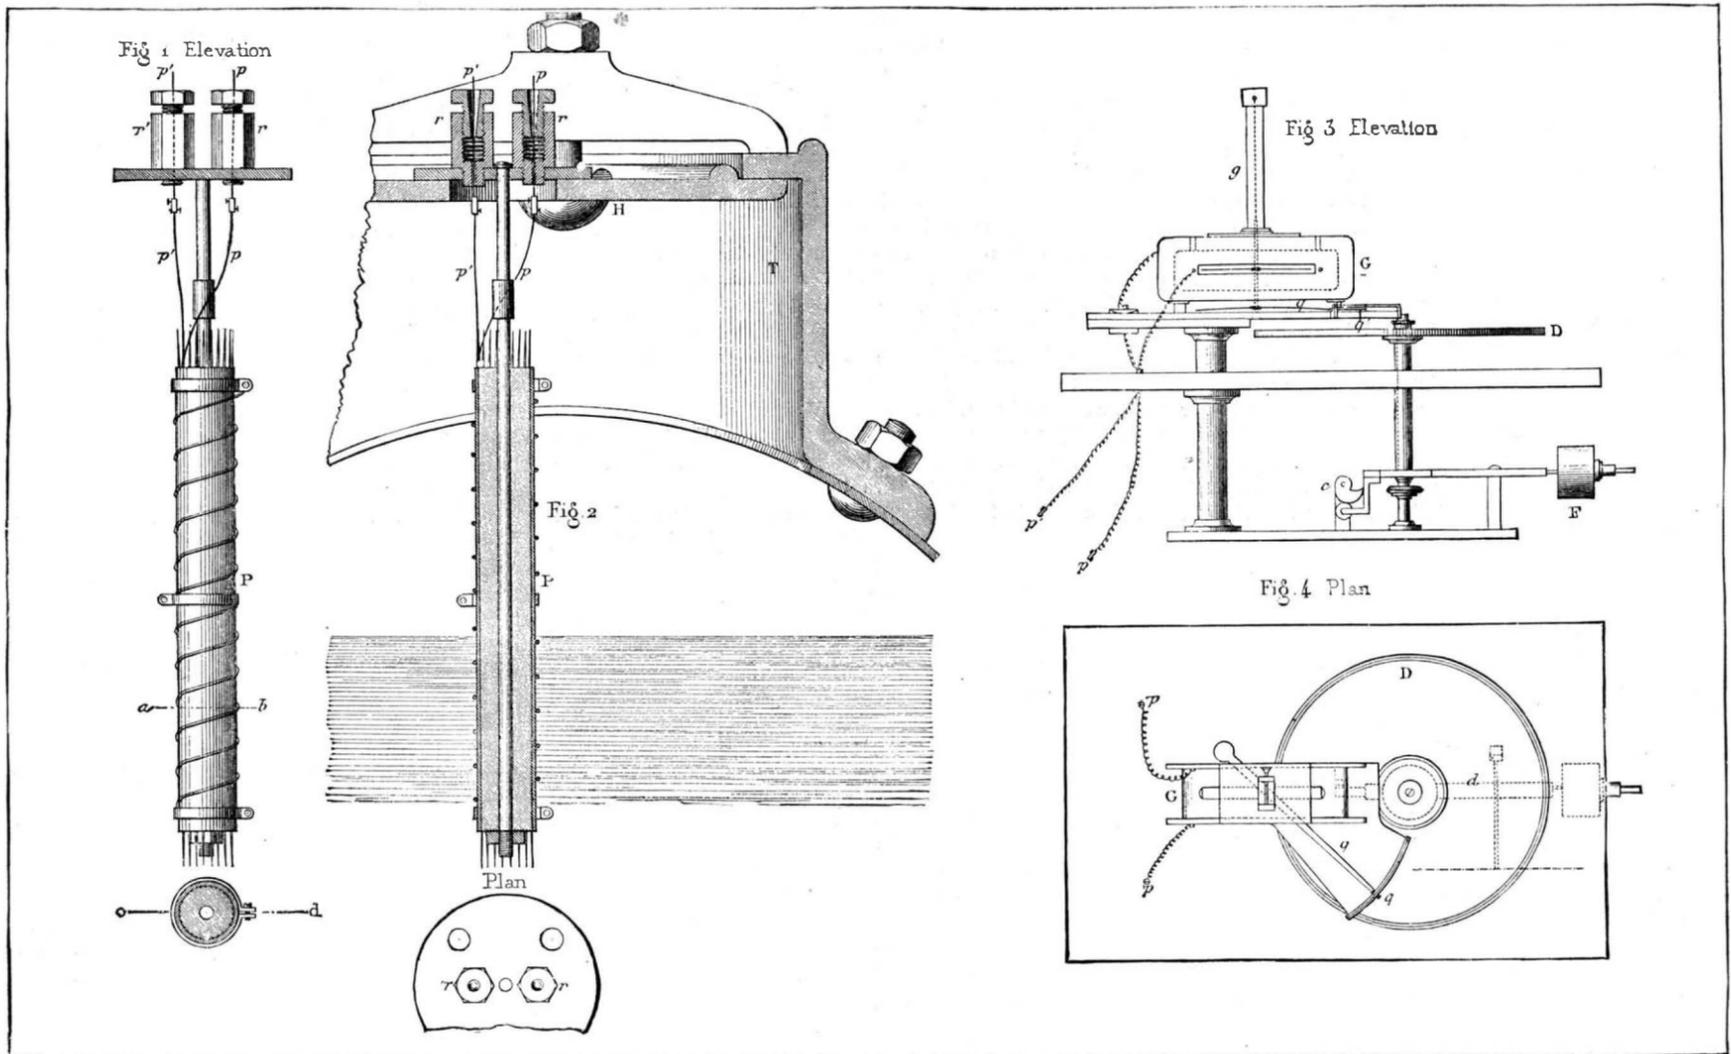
Elevation. Fig. 2.—Section through *cd*. Fig. 3.—Elevation. Fig. 4.—Plan (Scale 1/4).
